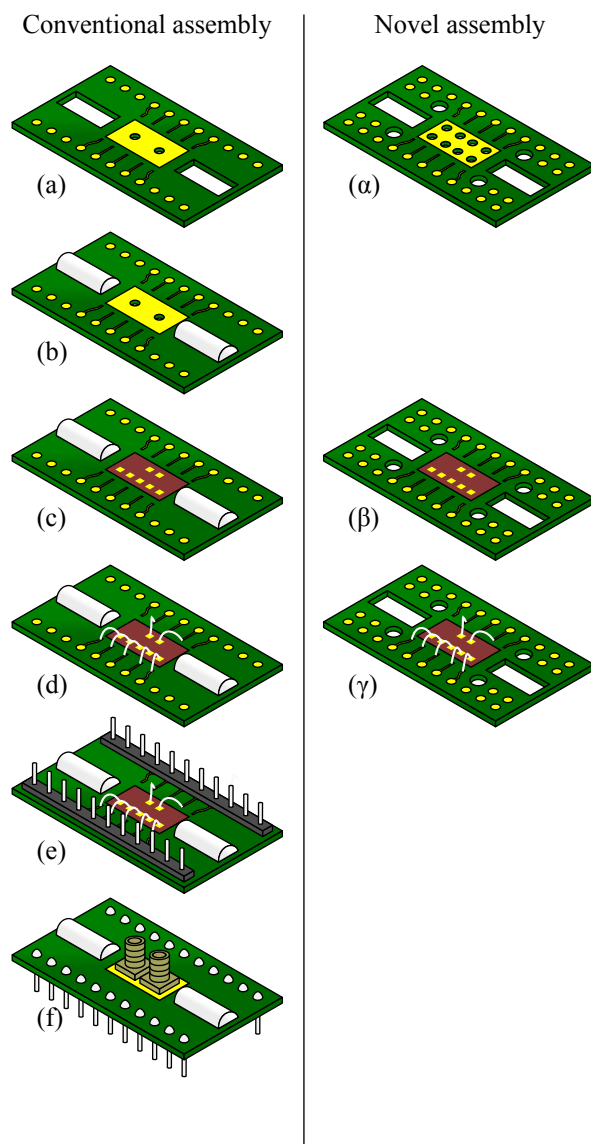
Conventional and novel assembly method for the interfacing of microfluidic chips. The conventional assembly consists of adhesively mounting magnets (b), adhesively mounting the chip on the PCB (c), wirebonding the chip to the PCB (d), soldering pin headers (e) and adhesively mounting fluidic connectors (f). The novel assembly consists of adhesively mounting the chip (β) and wirebonding the chip to the PCB (γ).
